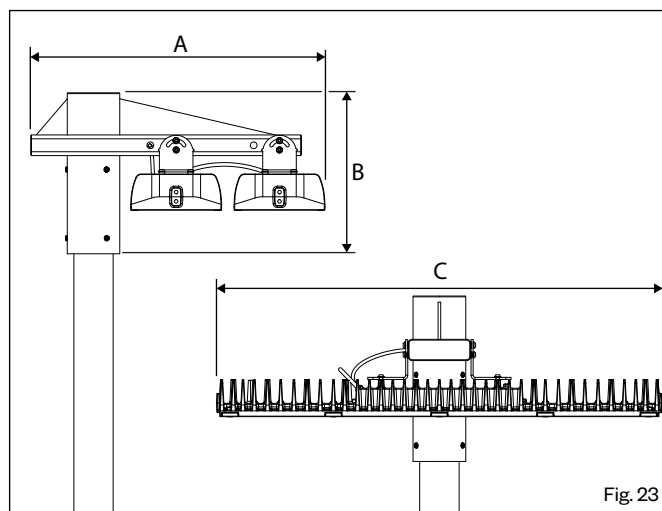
Direct Entry Mount - Overall Dimensions - See Table
